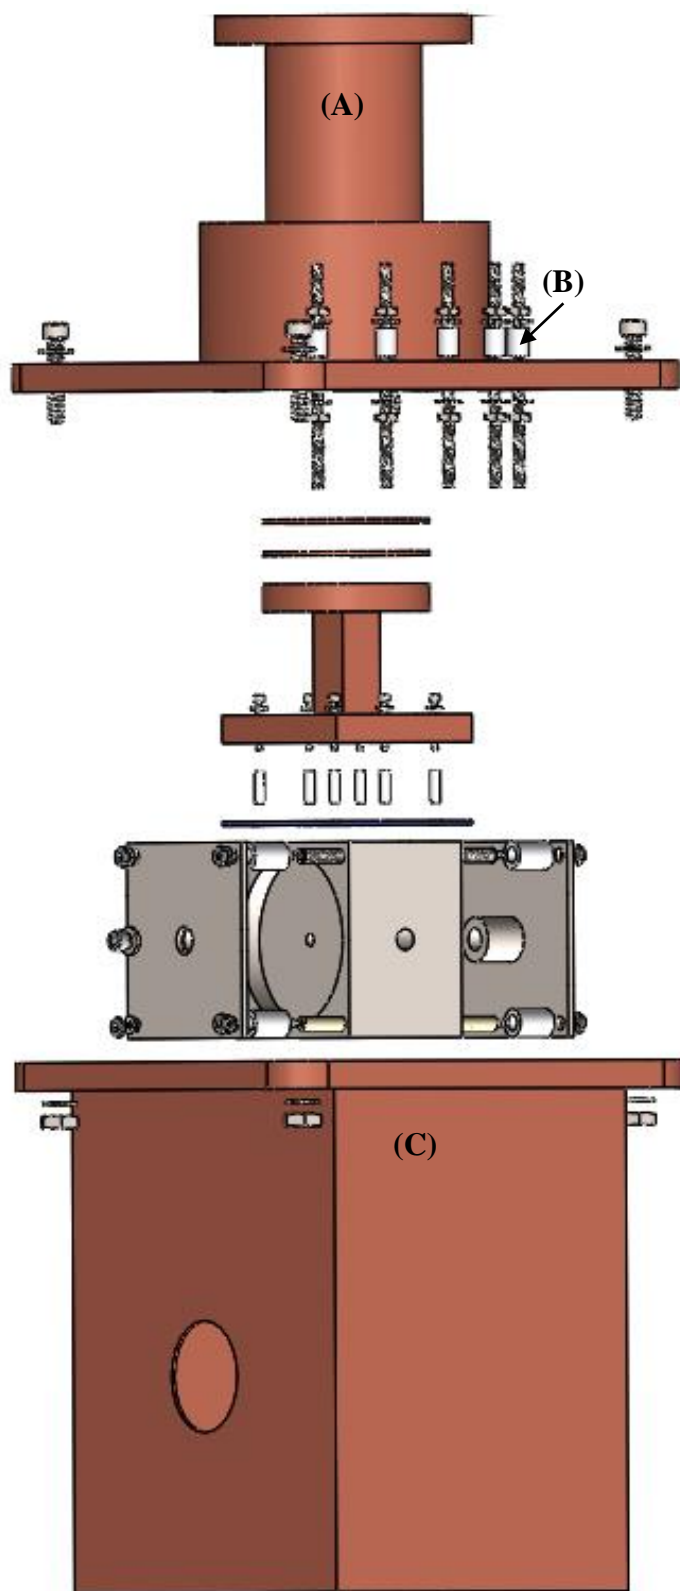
Inner and outer QIT shielding and mounting assembly. Drawn to scale. The shielding was made with gold-plated copper. (A) Top piece, mounted the isolated electrical connectors and was connected to the bottom shielding using 6-32 bolts. (B) Alumina tube, electrically isolated the threaded rod from the top piece of the outer shielding. The rods were fastened with alumina washers and stainless-steel hex nuts. (C) Bottom piece of the outer shielding, served as a radiative shield and as the environment surrounding the trap.
